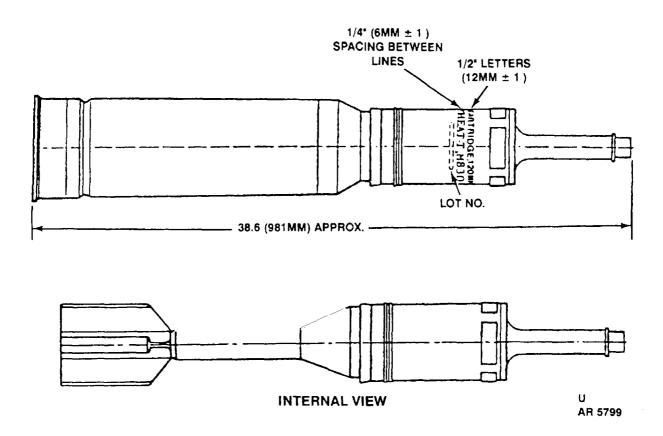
Typical marking for 120mm gun cartridge, M830.
